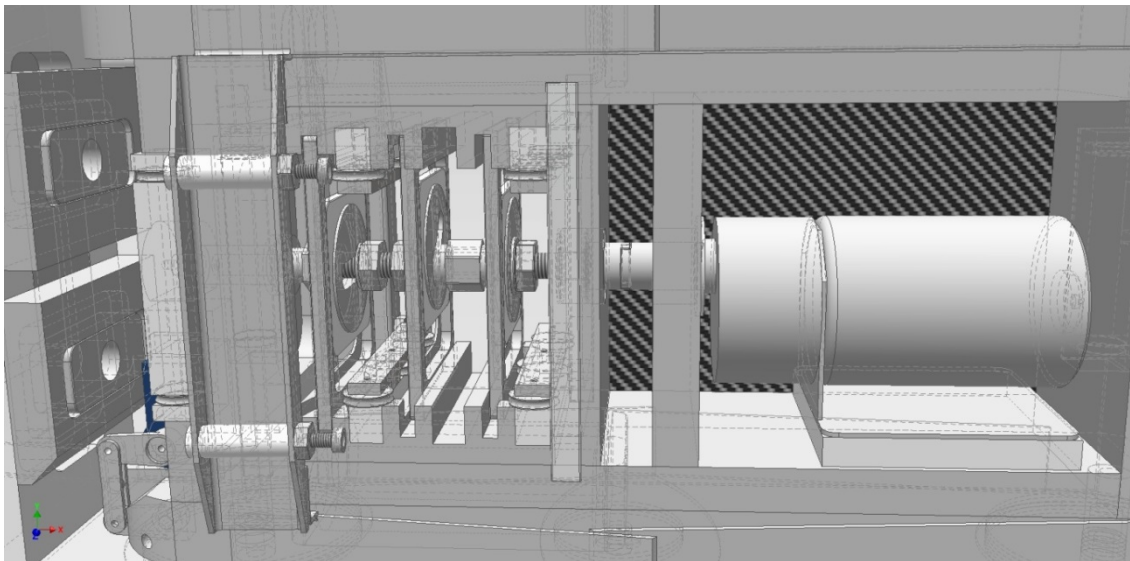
Adjustable power transmission system offset drive crank and linkage, side view includes actuator assembly.
